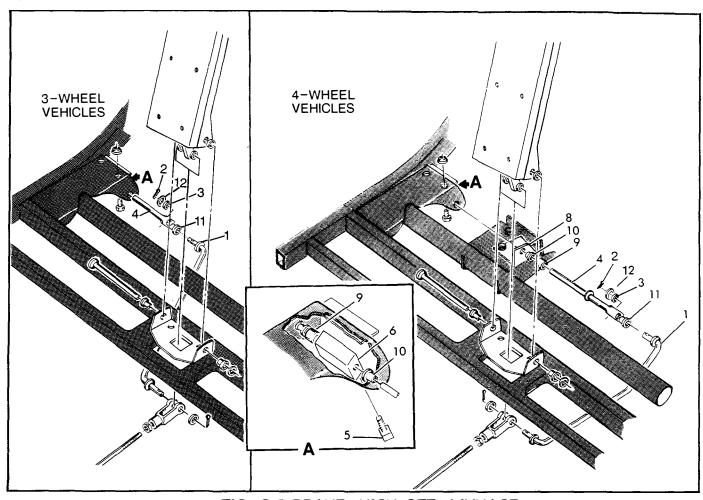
BRAKE "KICK OFF" LINKAGE
